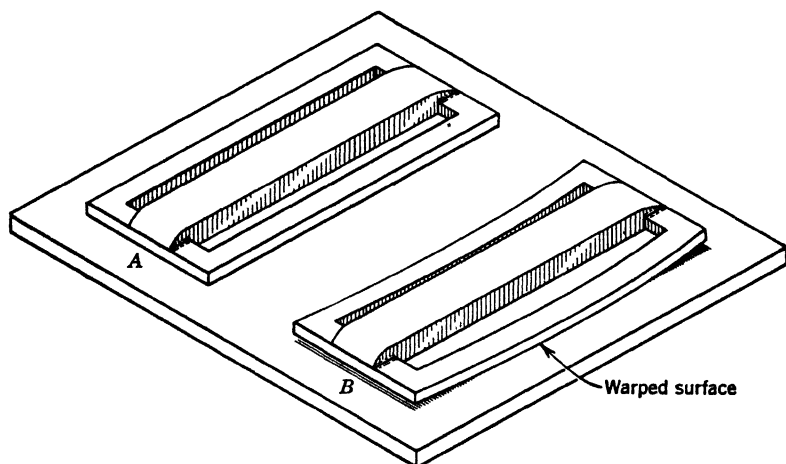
Castings with varying sectional thickness may warp as illustrated in drawing B. Drawing A shows the pattern used in producing the casting.
